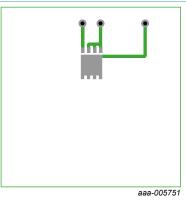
PCB layout for thermal resistance junction to ambient minimum footprint; FR4 Board; 2oz copper
